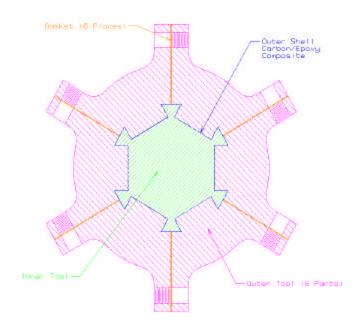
Tooling used to produce outer carbon/epoxy shell
